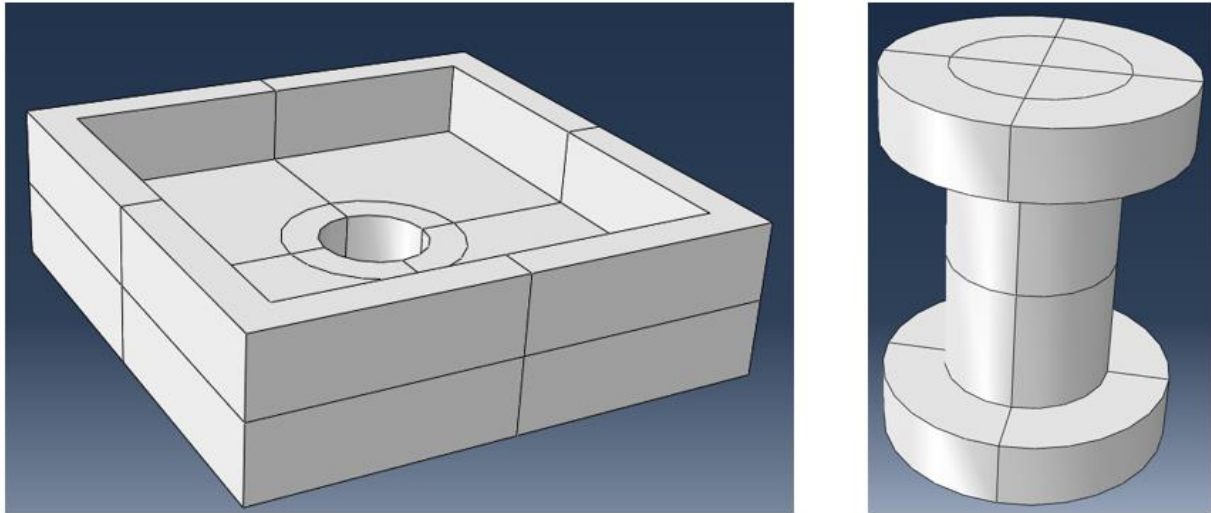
Parts used in FEA(left side symmetrical member, right side bolt-nut assembly)
